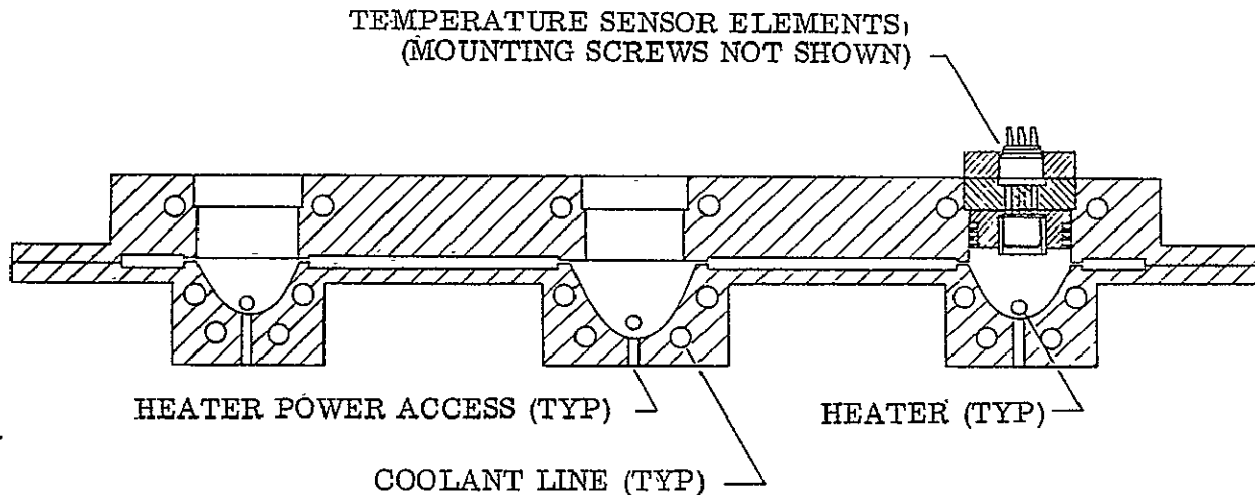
Temperature Sensor Installation - Cap Heating Section
